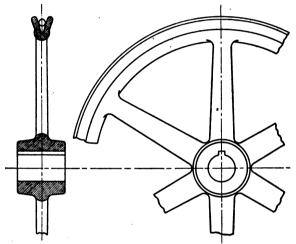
V-Grooved Hoisting Sheave for Light Hand-Power Elevators
